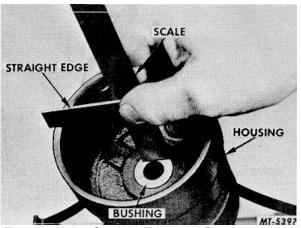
Using Straight Edge and Scale to Locate Upper Bushing in Housing
